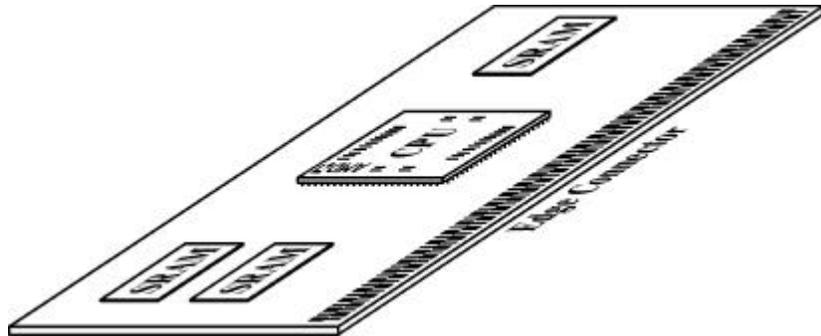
A microprocessor chip in a BGA package mounted on a printed-circuit card.
